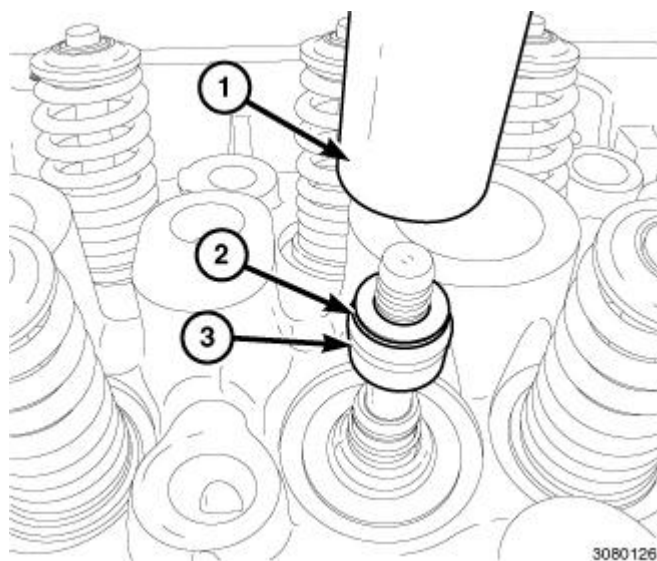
Driver, Garter Spring & Valve Guide Seal
